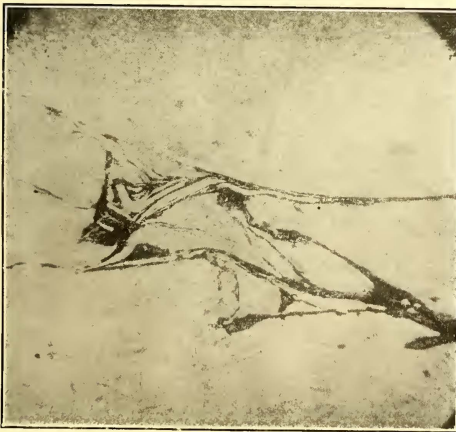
SLAG FLAW IN STEEL TIRE, SHOWING FOLD OF METAL NEAR THE SURFACE OF THE TREAD
